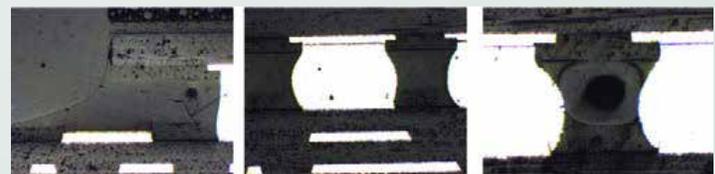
Cross-sections of BGA joints assembled with epoxy flux EF-A.
